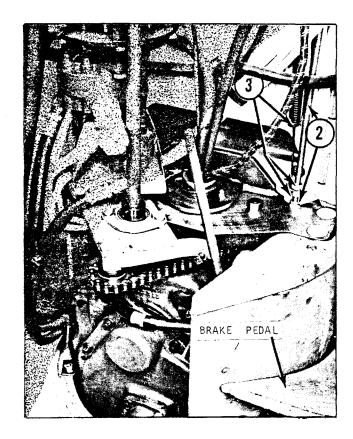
Deadman Rod Adjustment (as viewed from rear of machine — both rear doors open)
